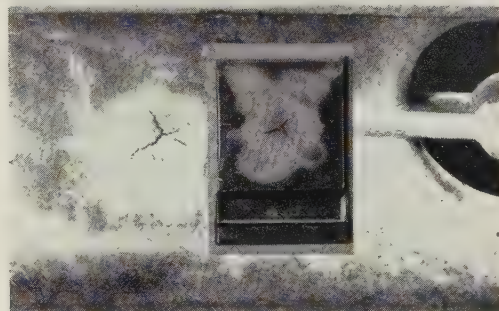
Hot-Spot Die-Casting and Production Casting in LM4 Alloy, Showing Identical Shrinkage Defects. (Scheuer.)
